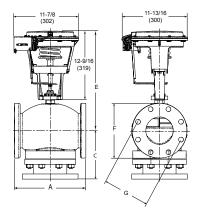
MK-6811 with Flanged 3-Way Globe Valves
